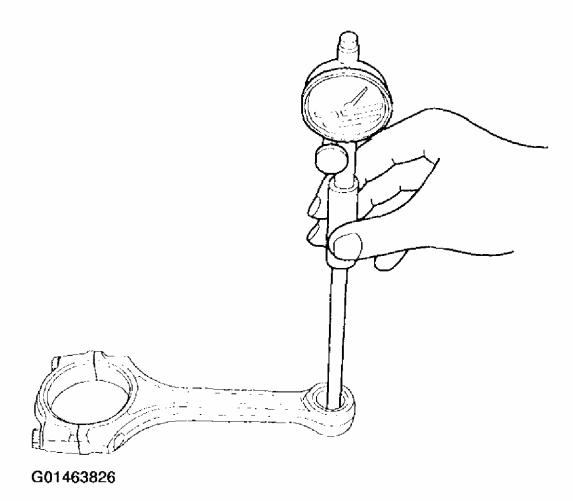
Measuring Piston Pin-To-Connecting Rod Clearance Courtesy of AMERICAN HONDA MOTOR CO., INC.
